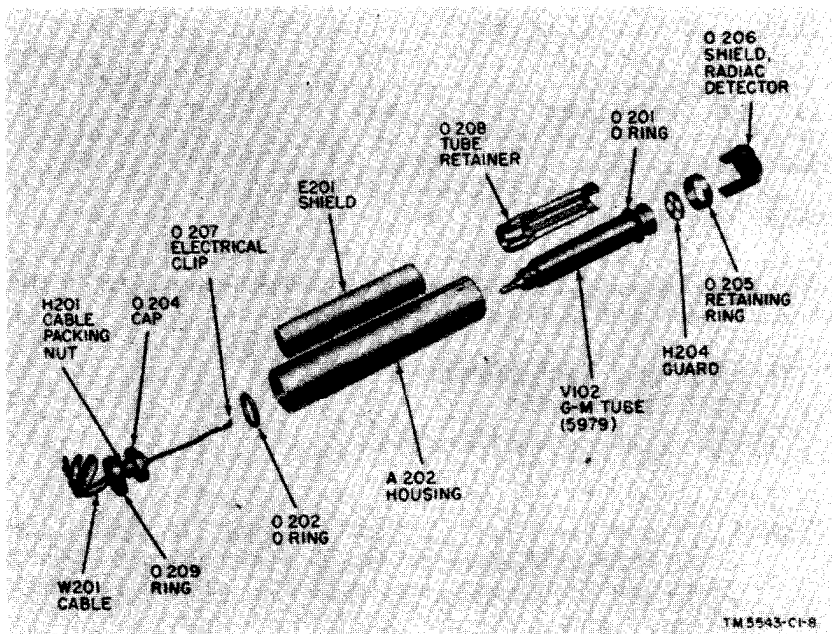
(Added) *Radiac Detector DT-53D/PDR-27, exploded view.
